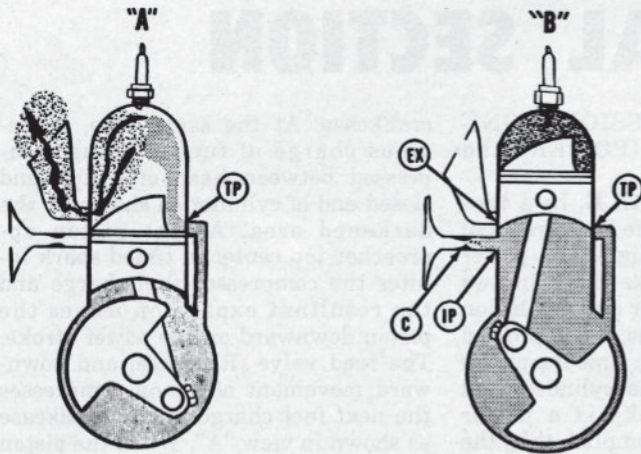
Two stroke, three port engine. Principles are similar to reed valve or rotary valve types except that a third, intake port is located in cylinder wall and opened and closed by the piston skirt.
